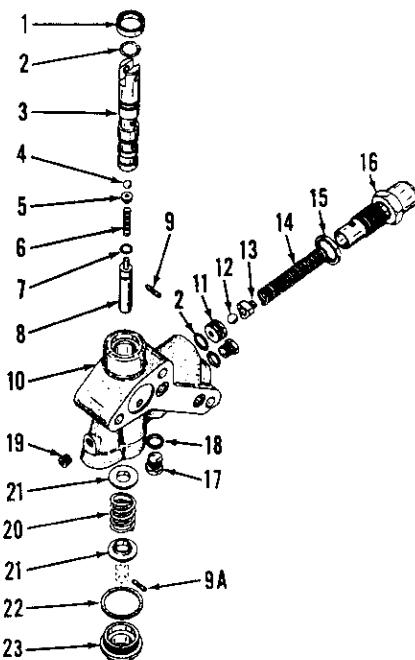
Exploded view of the single acting independent auxiliary valve used on Series 384.
